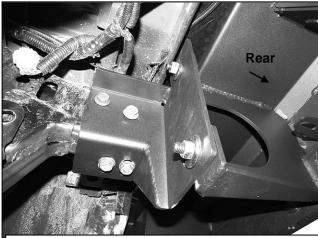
Unplug license plate lights and trailer connector. Remove lights and
